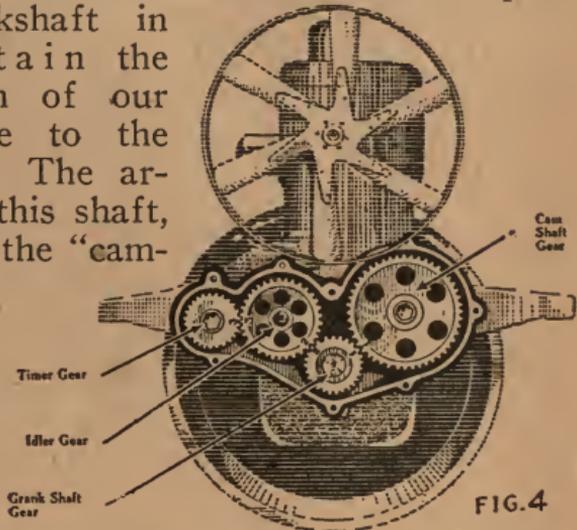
Showing how the camshaft is driven at half crankshaft speed.
